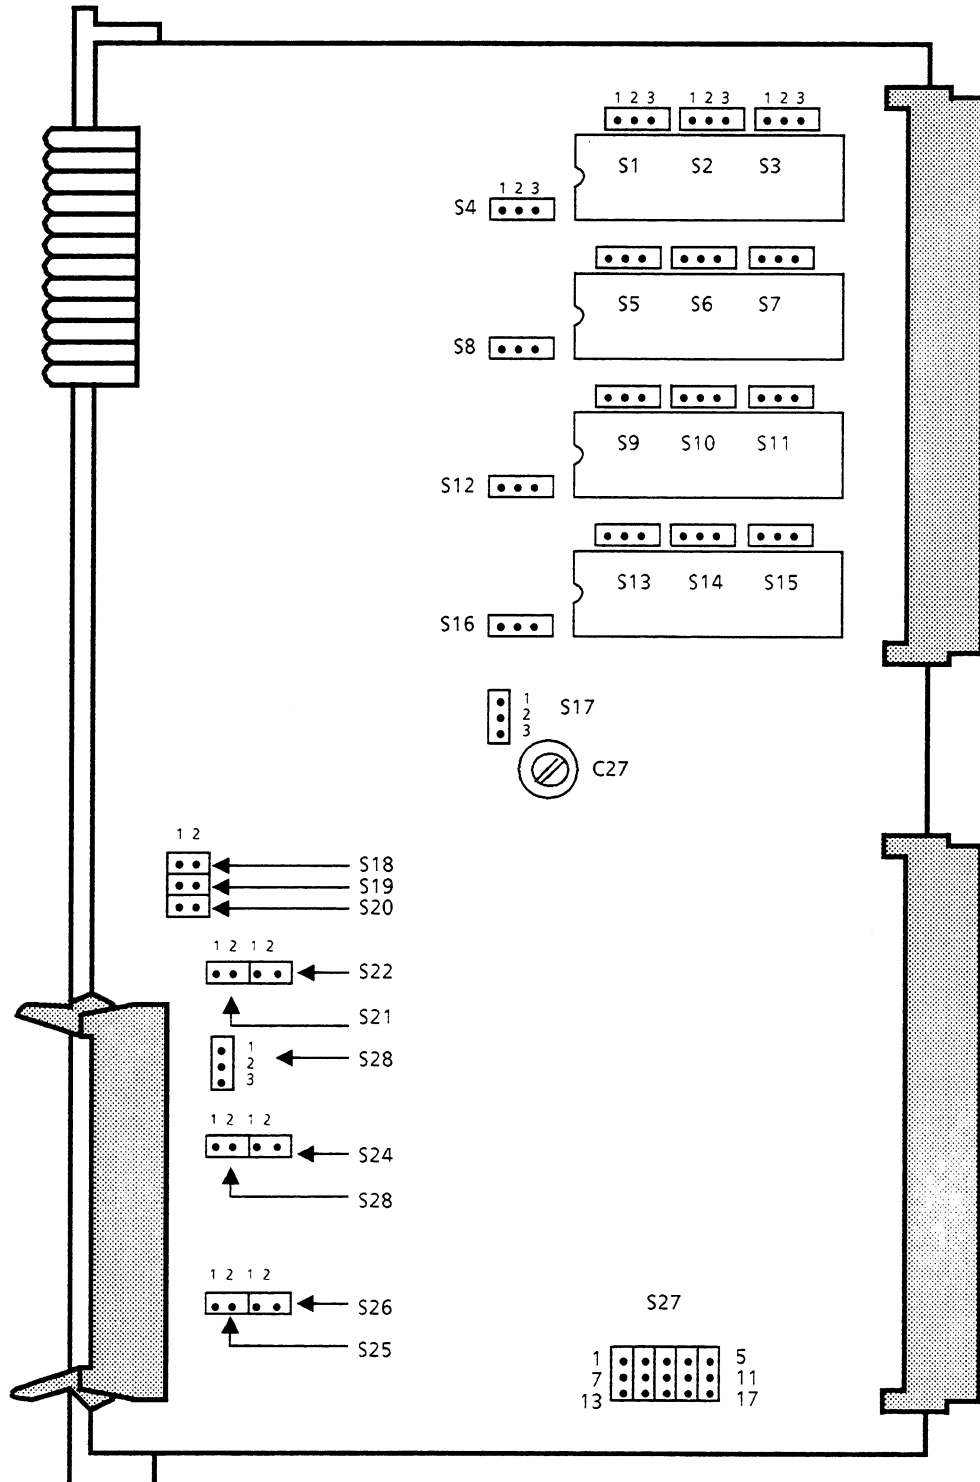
Layout of Switches and Jumpers on the 3100-UC1 Board
